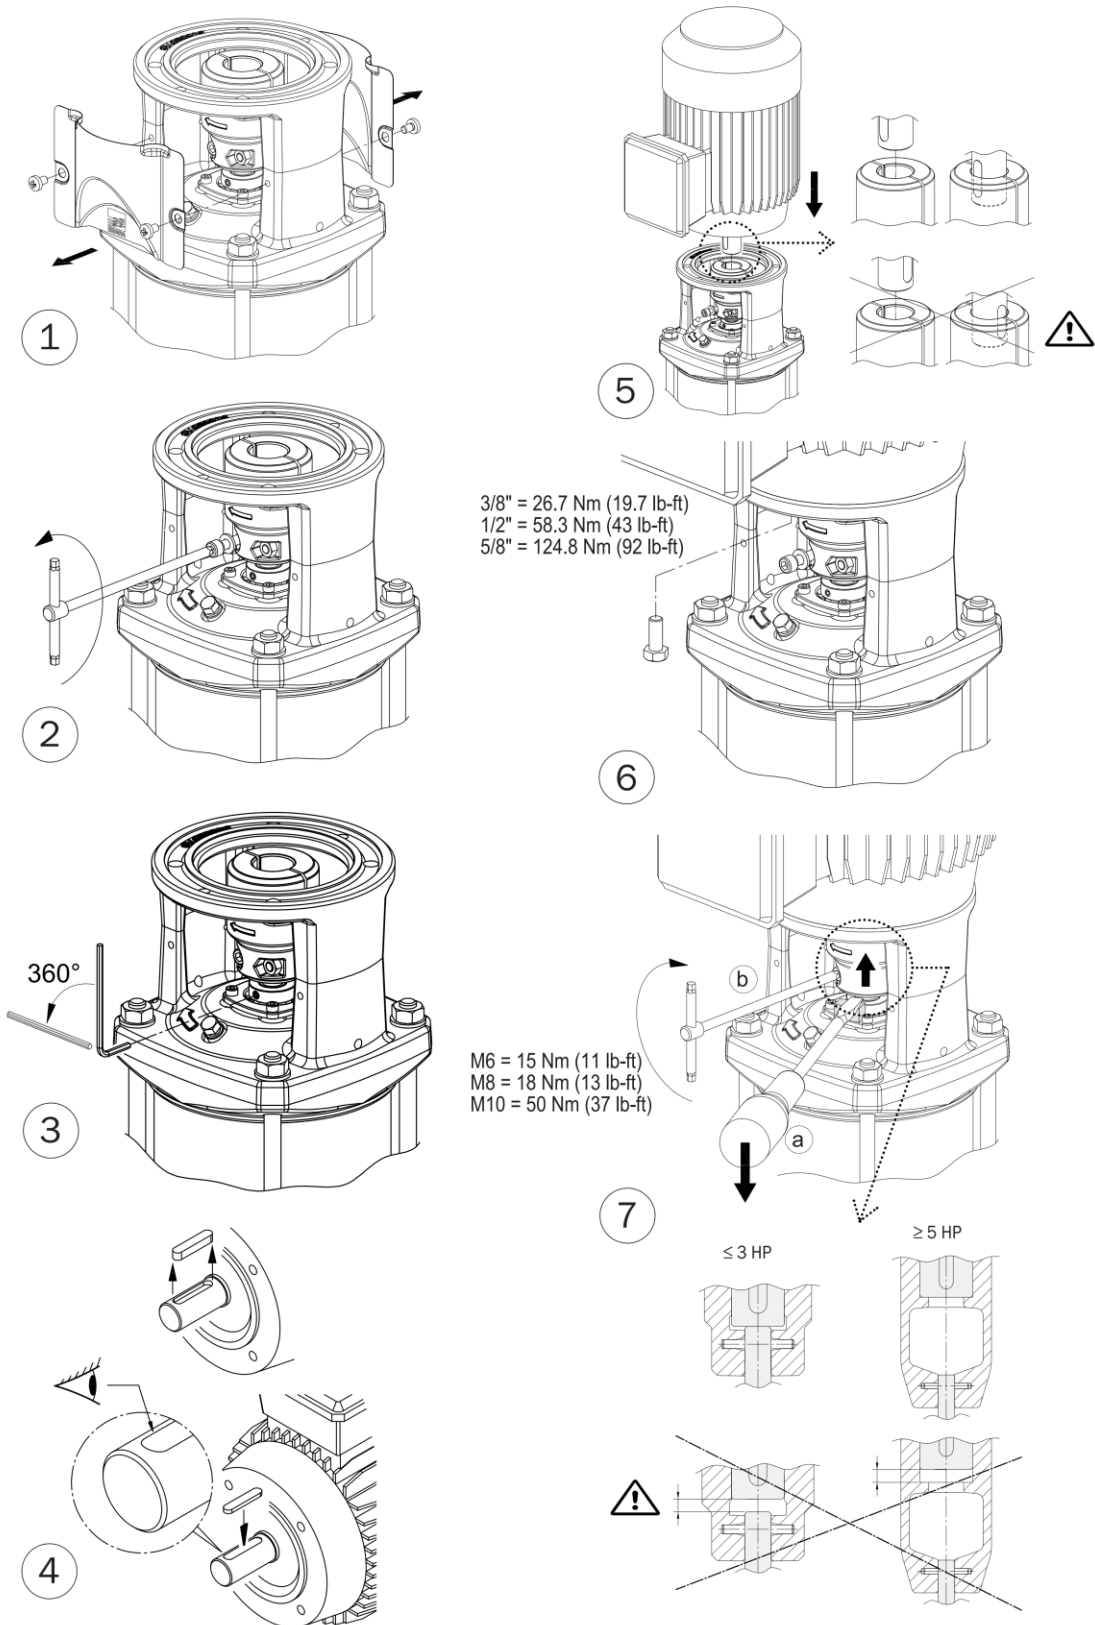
Assembling the Motor to the Pump – RSVS1 to RSVS20 [-A-] (Sheet 1)
